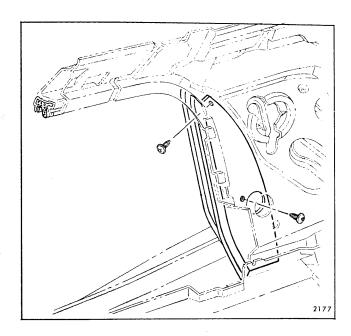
Rear Quarter Window Glass Run Channel - "B-47" Style
